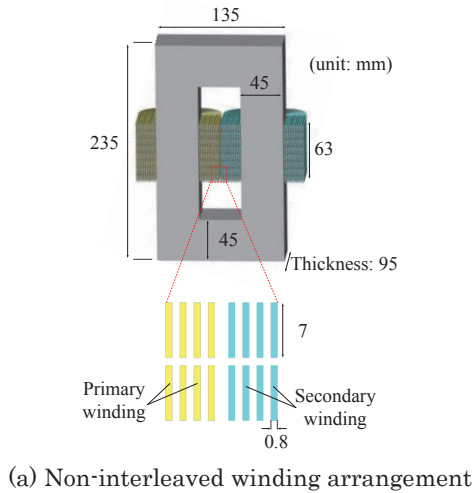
Shape and winding arrangement of a test amorphous transformer.
